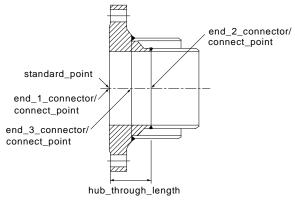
Weld\_neck\_jacket\_flange
